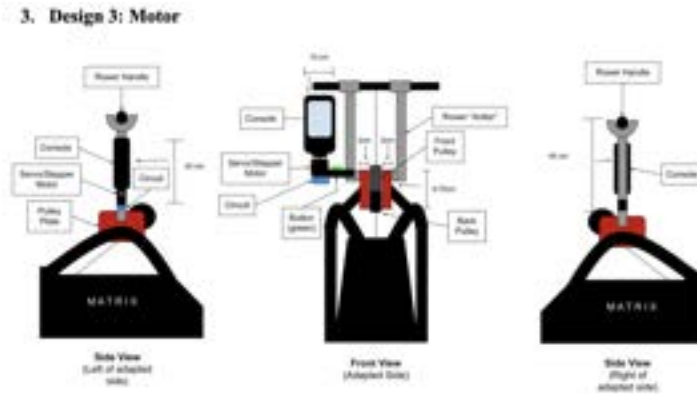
Design 3: Motor. This design utilizes a servo/stepper motor to electronically turn the console 180° with the push of a button (shown in green). The motor is secured to a platform attached to one of the outriggers on the rowing machine. The distance the console is offset from the midline of the rowing machine will be minimized. A 3D printed bracket will secure the console to the motor with the help of glue or screws. The motor will be controlled using an Arduino that rotates the console between the standard and adaptive orientations when the user presses the button. All circuit components, except the button and motor, will be stowed in a compartment (shown in blue) below the platform for safety and aesthetic purposes.
